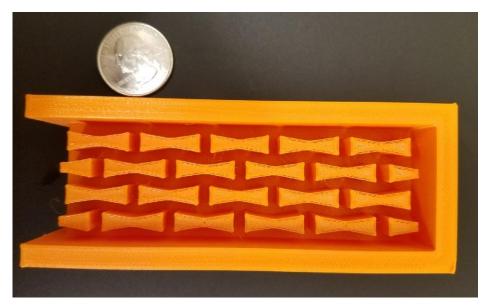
3-D printed top view model 1 Top view of a 3D printed mold of the Re-entrant Masters-Evans model 1
